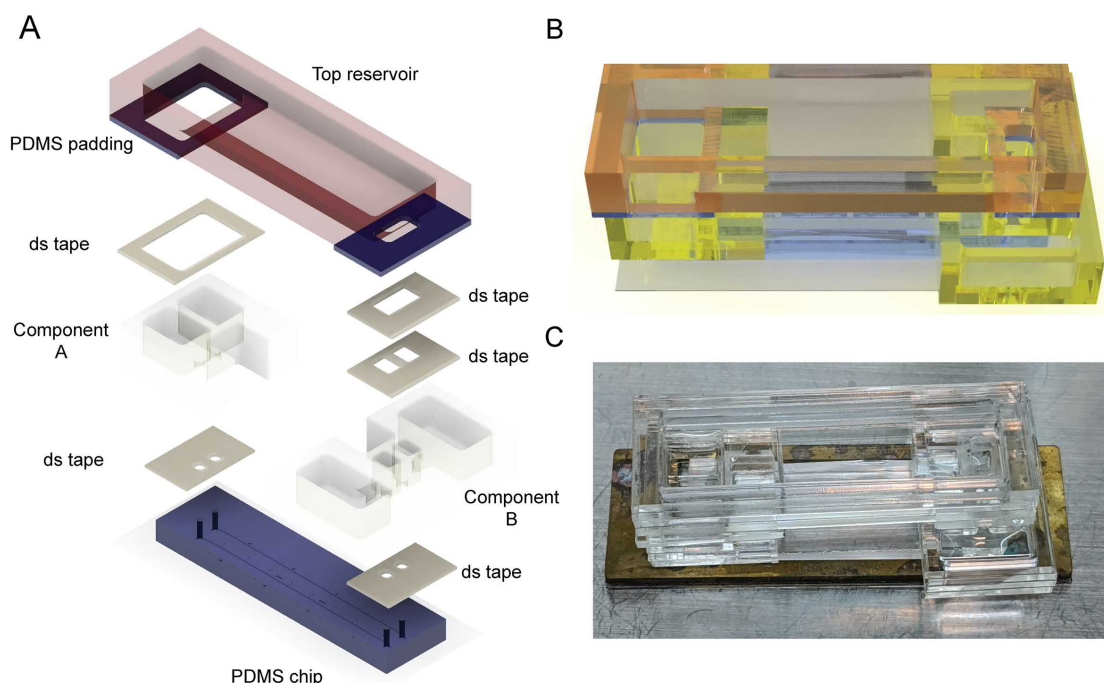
The assembled PMMA/PDMS chip. (A) The exploded view of the components for PMMA/PDMS chip; (B) The 3D rendered model of the assembled device; (C) The photoimage of the assembled device for experiment.
